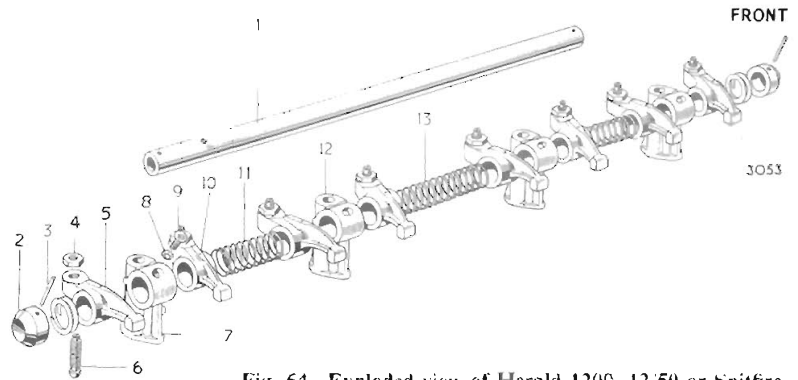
Exploded view of Herald 1200, 12/50 or Spitfire rocker assembly
